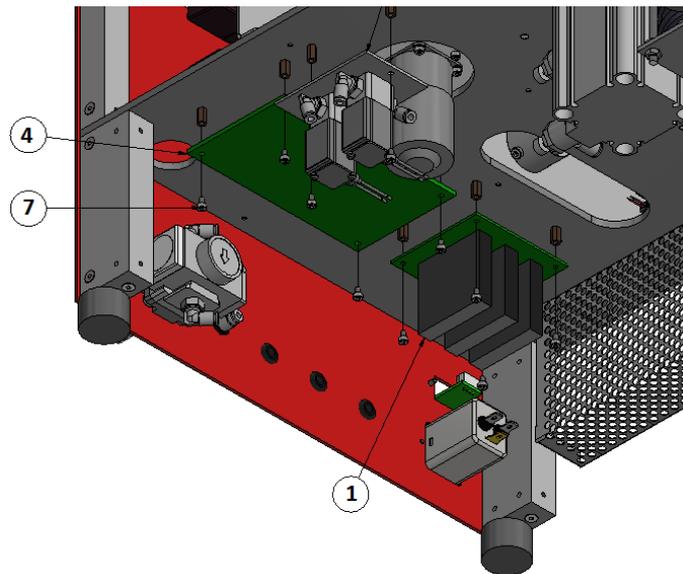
Electrical connection view of the AL-X13 control board of the analyzer.
